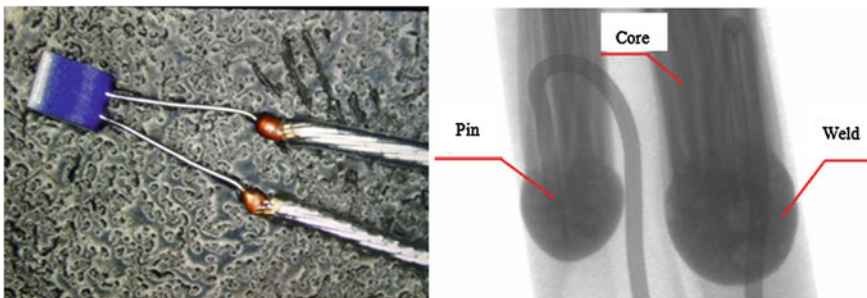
X-ray photography of platinum resistance and wire welding
